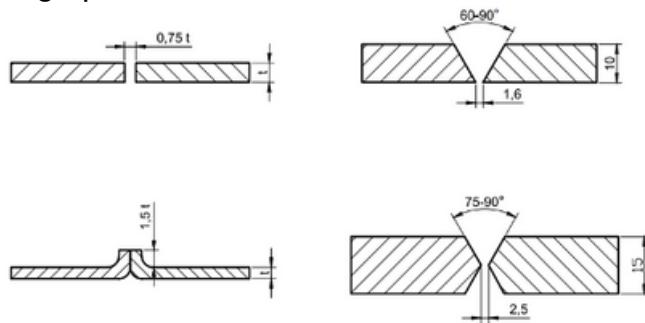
Weld Groove and Dimensions Used in Copper Welding
